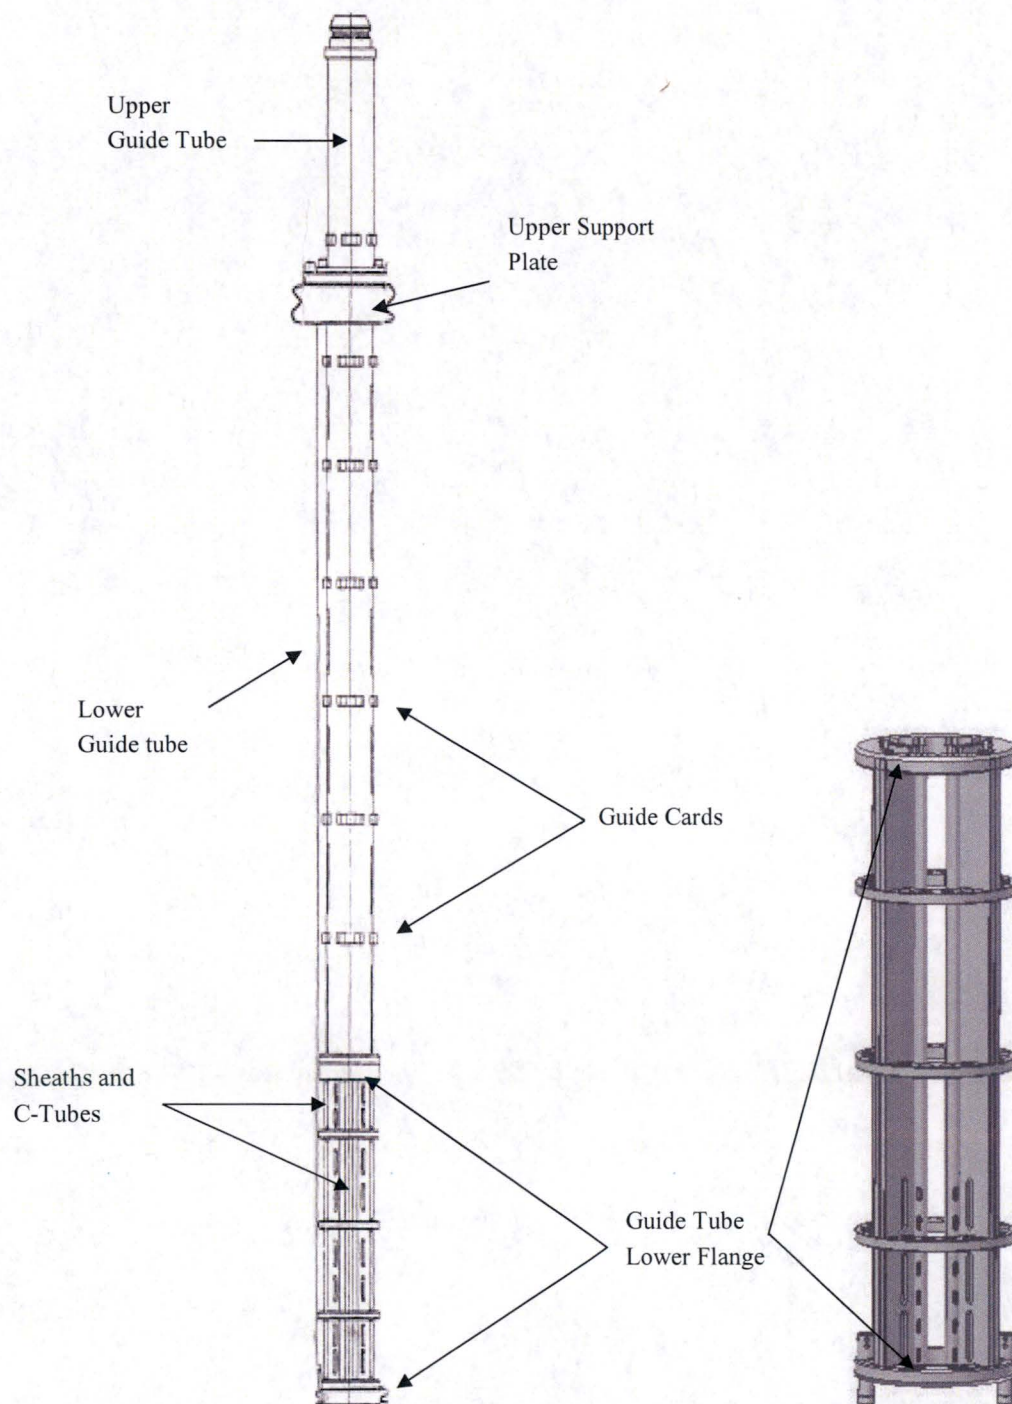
Typical Lower Section of Control Rod Guide Tube Assembly
